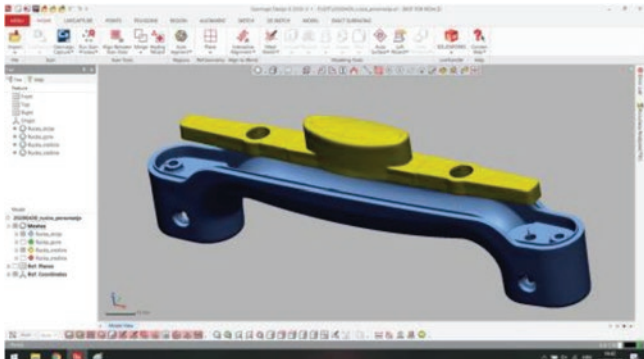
reverse engineered part with ATOS 3D scanned bottom part of the handle
